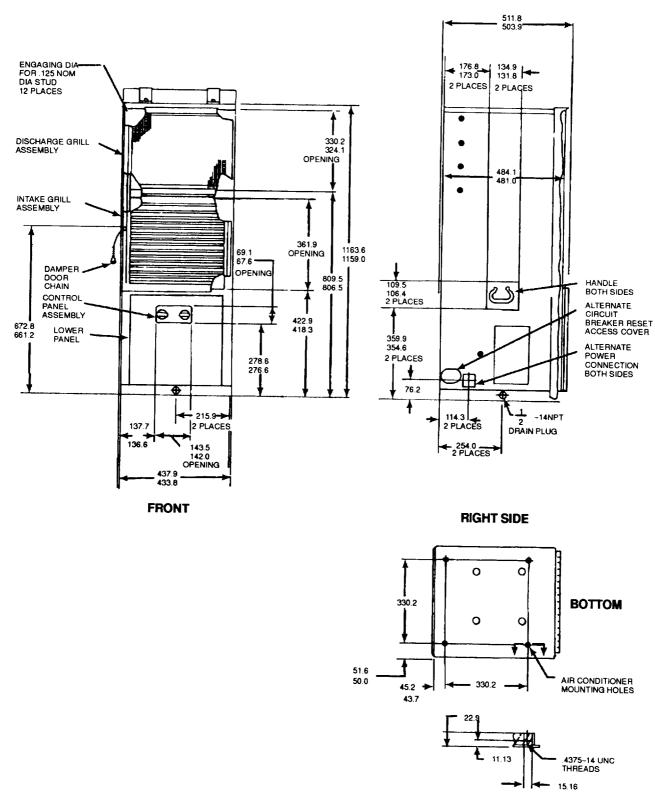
Installation Dimensions (Sheet 3 of 4)
